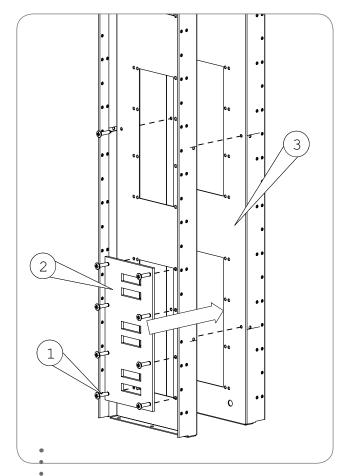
Assembling a frame plate package. The frame plates are fastened together using screws or rivets and insulators are installed as necessary.
